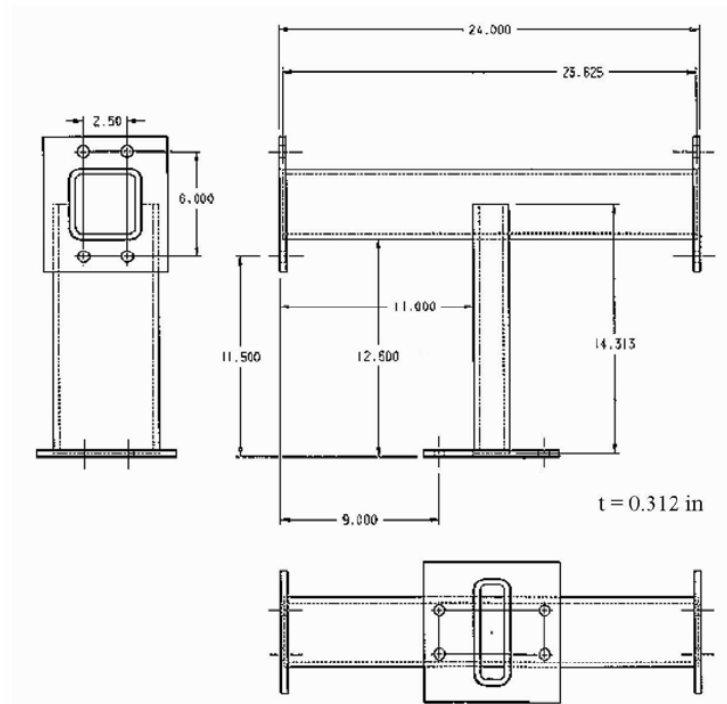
Desmoines welded T-joint and applied load (1 in = 2.54 cm)
